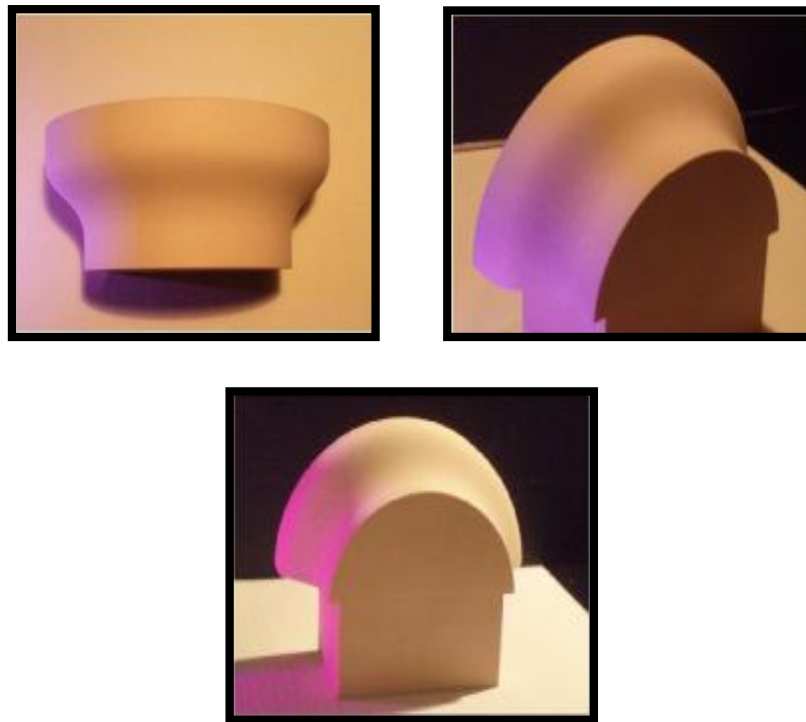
The machined models produced by CNC milling machine (3-axis). Sample designed by interpolator Bezier profile and machined with cutter diameter equal (roughing=16mm and finishing=5mm).
